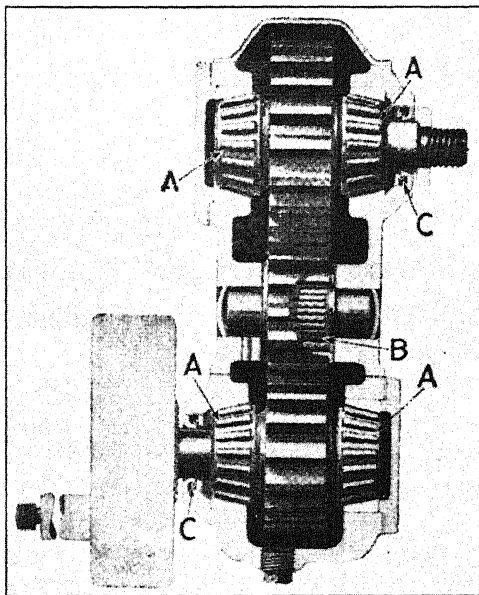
Gear-drive power transmission for tractor mower. A—Tapered roller bearings. B—Straight roller bearings. C—Thrust bearings.
